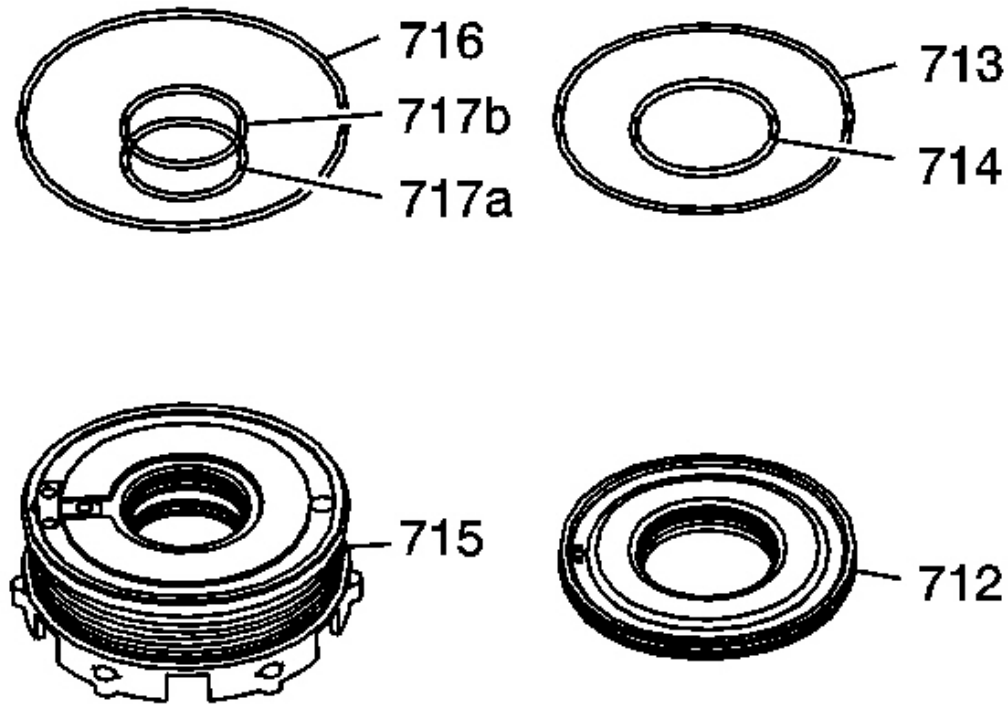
Inner, Outer O-Ring Seals & Piston Assemblies
